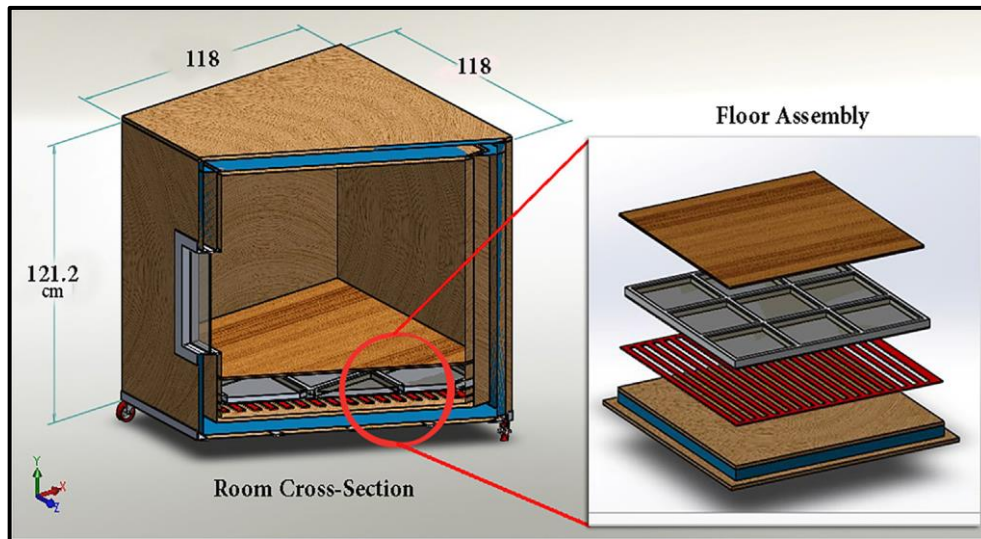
Cross-Section of the Prototype and the Floor Assembly [24].
